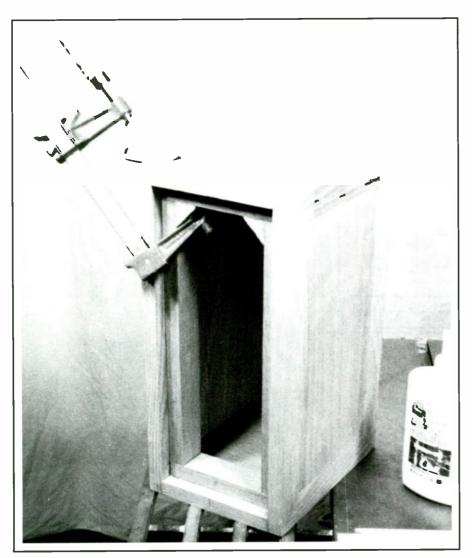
Tunnel construction. A bar clamp holds a small corner block in place as the glue sets.
